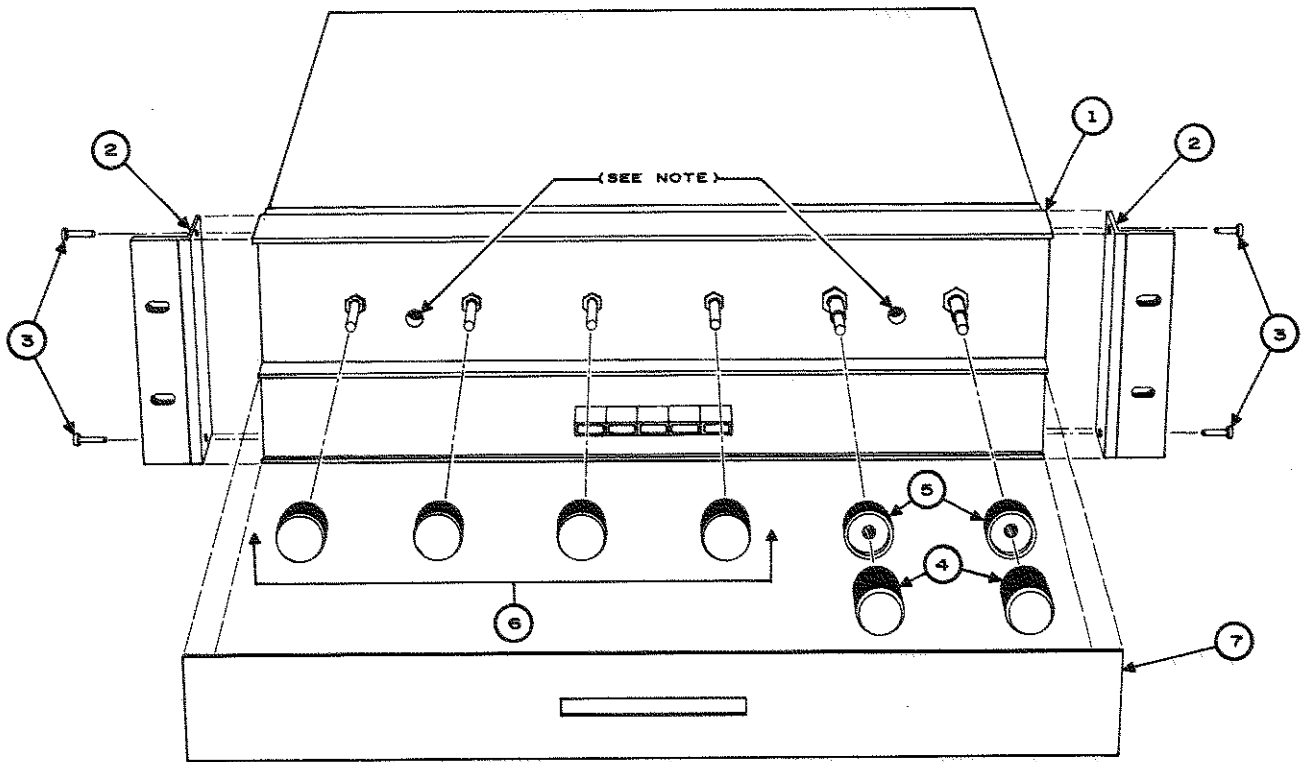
CHASSIS ASSEMBLY, 40821
